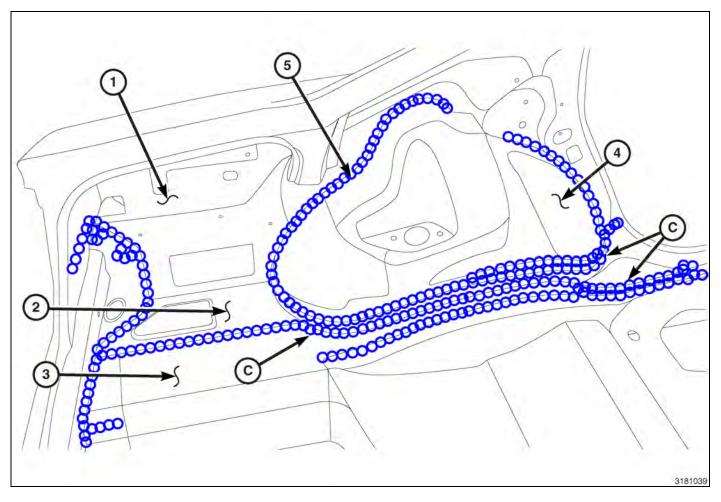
Rear Inner Wheelhouse (3 of 3)
